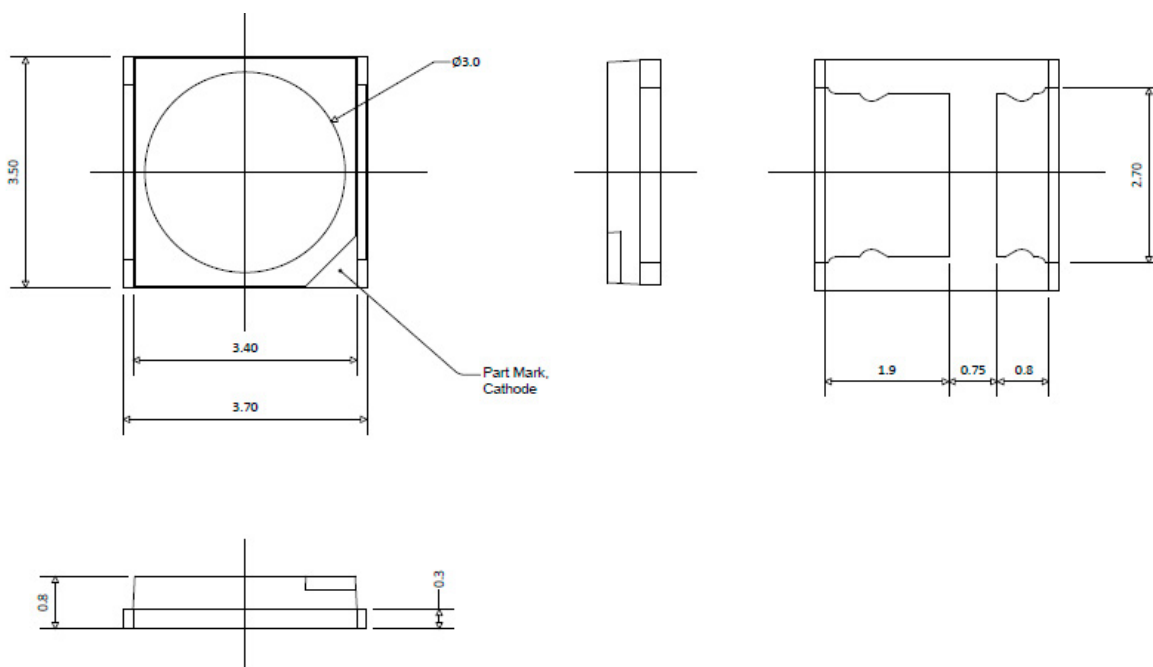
Mechanical dimensions for LUXEON 3535L MXAx-PWxx-0000 and MXAx-PWxx-H001.
